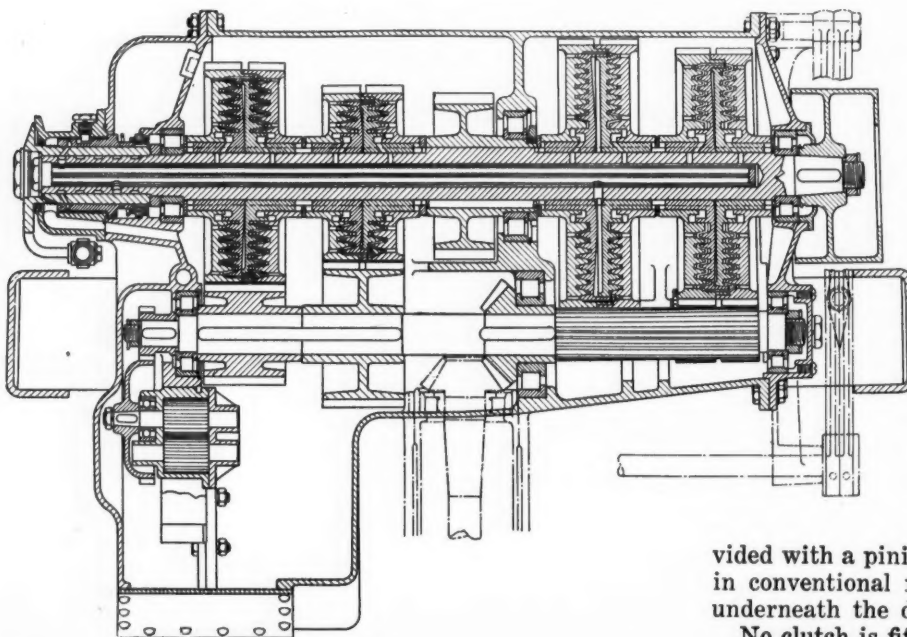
Hydraulically operated gearsets showing the oil pump, oil distributor and the combined clutches and gears for the various speeds
